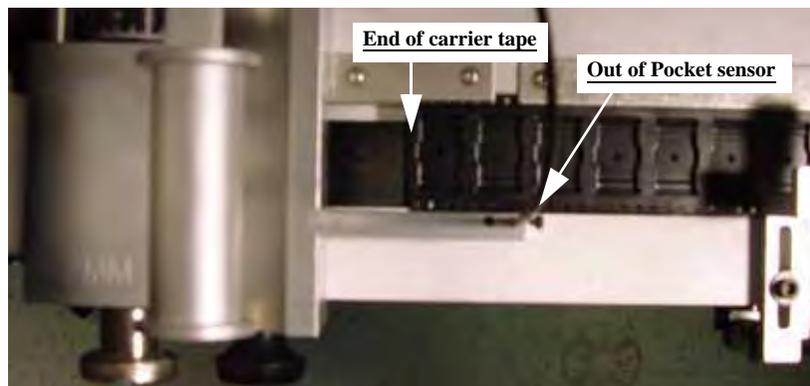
Out of Pocket sensor and tape location on the tape output
